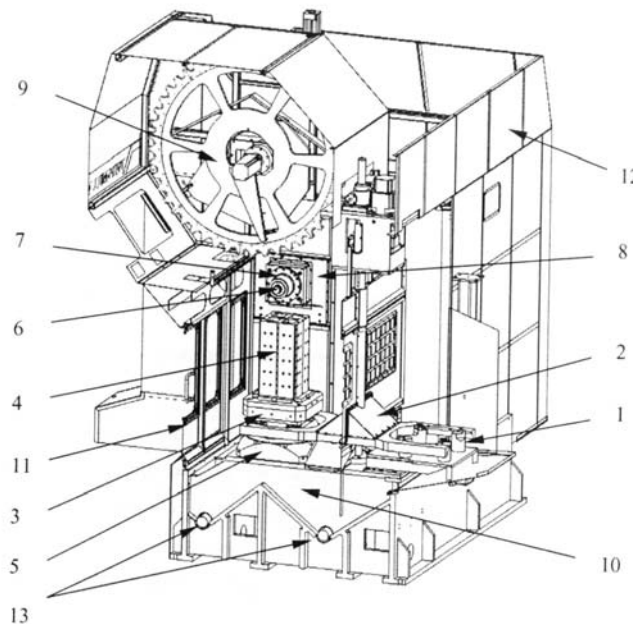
The main parts of the Twin-Mill machine tool [Malvisalo 2001 p. 24]
